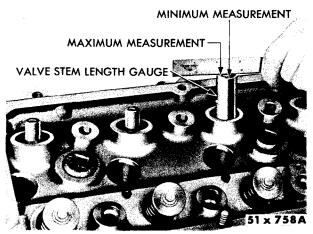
Checking Valve Stem Position (Double Rocker Engine)
